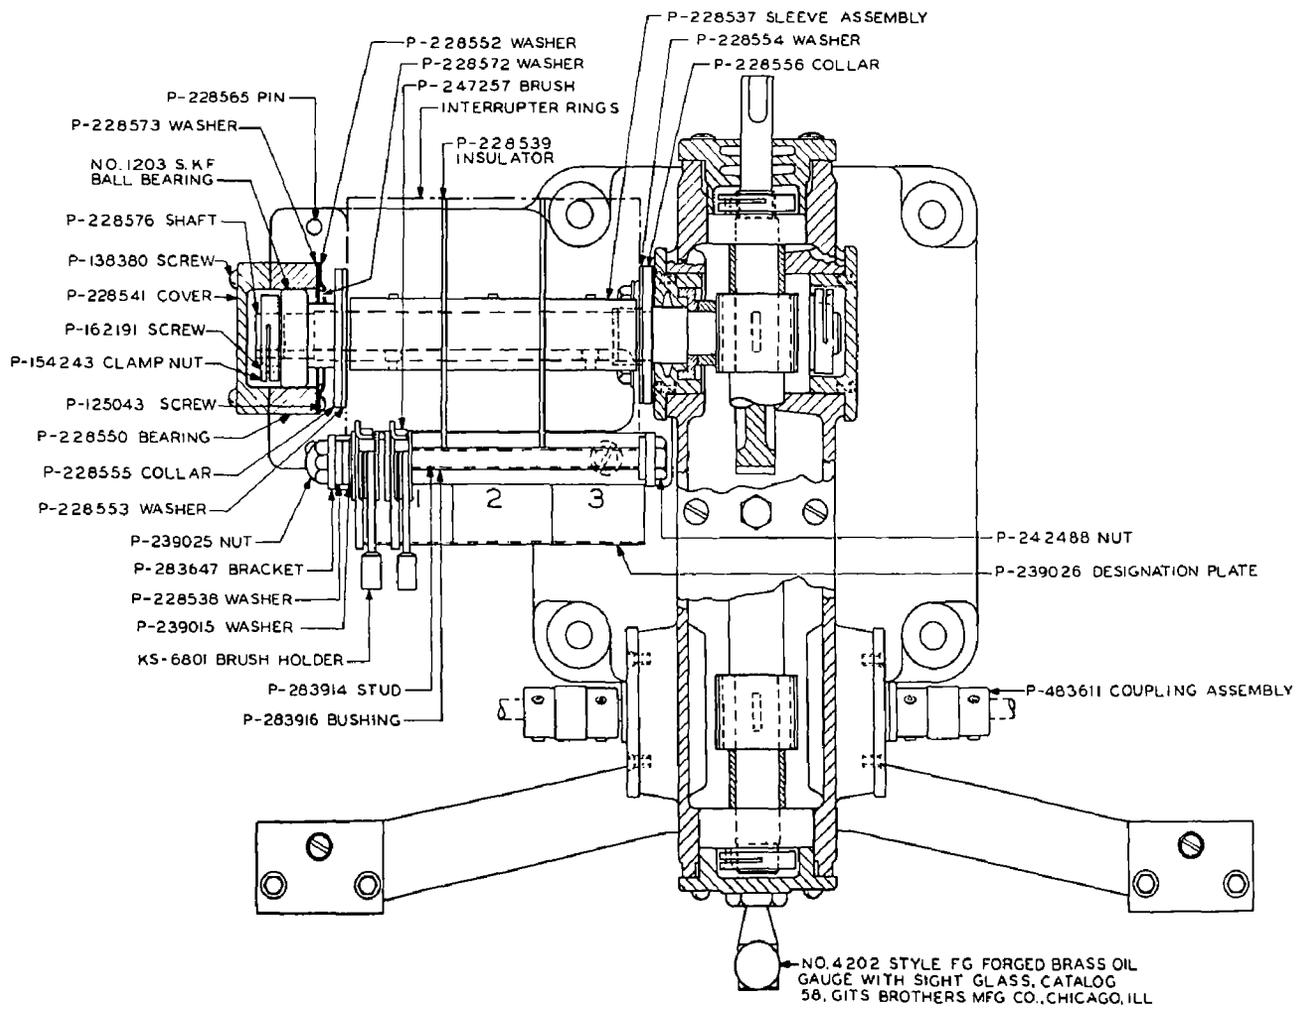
3A Interrupter Mounting—Top View (For End View See Fig. 14)
